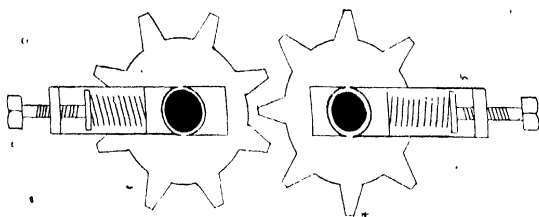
Rollers of Granulating Machine. Detail showing Spring Bearings.
